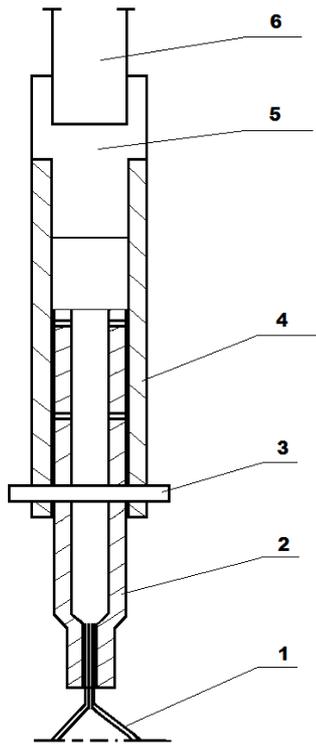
Probe connected to force gauge: 1 - probe tip, 2 - lower part of rod, 3 - cotter pin, 4 - upper part of rod, 5 - screw nut, 6 - force gauge tip
